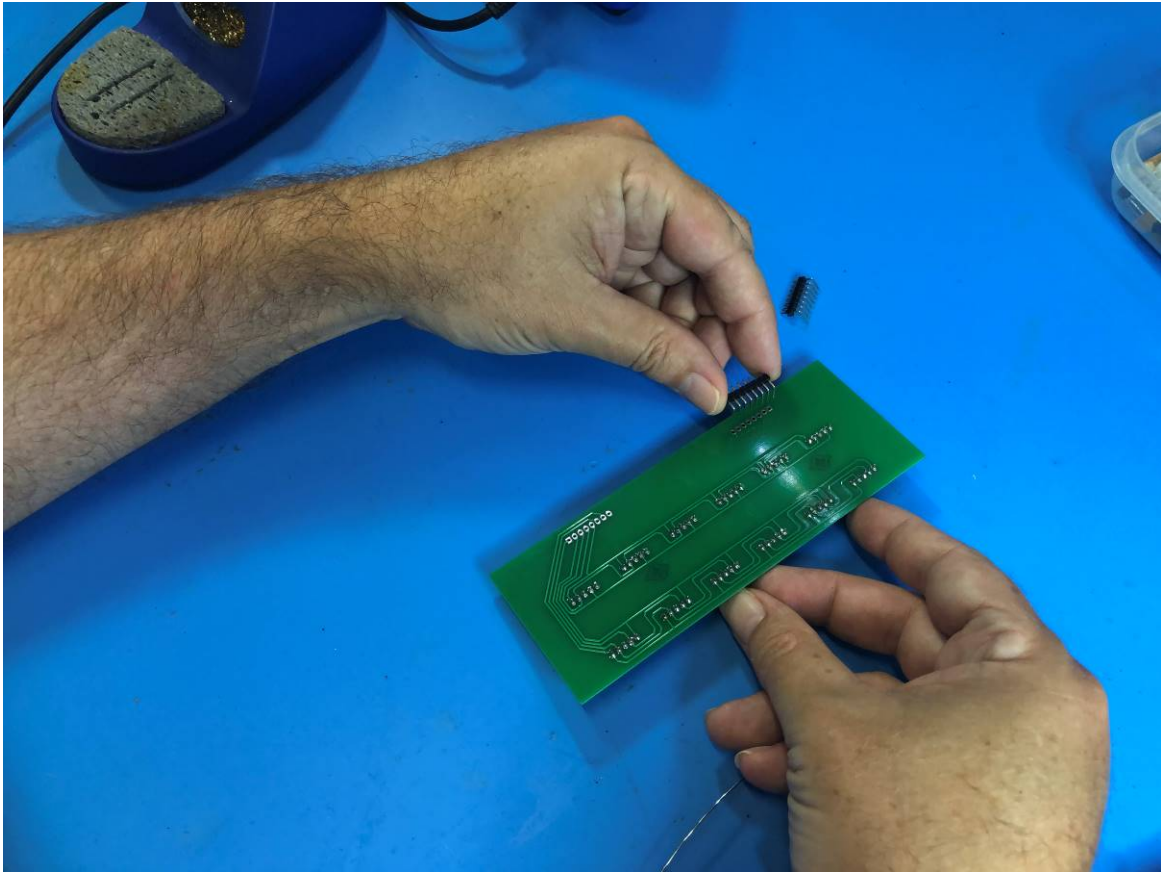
Install the right-angle headers. The longer (bent) side goes through LED vertical board from the back of the PCB.
